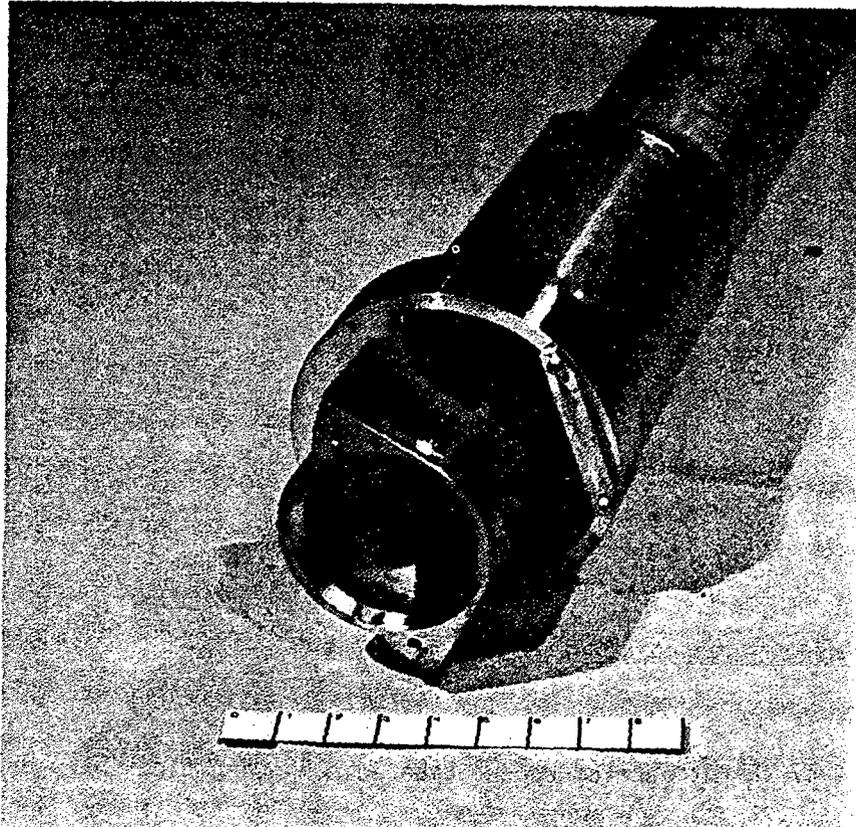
End View of Fuel Support's Circular Main Flow Area;
